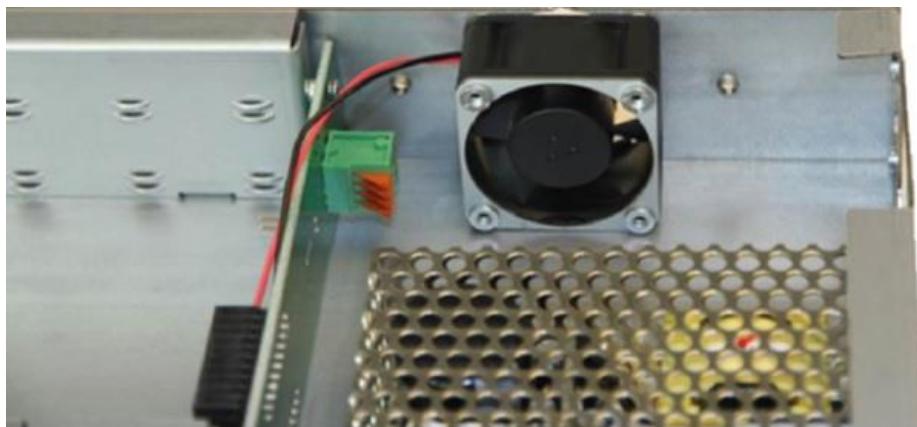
Positioning the Mounting Plate for the Chassis Fan
